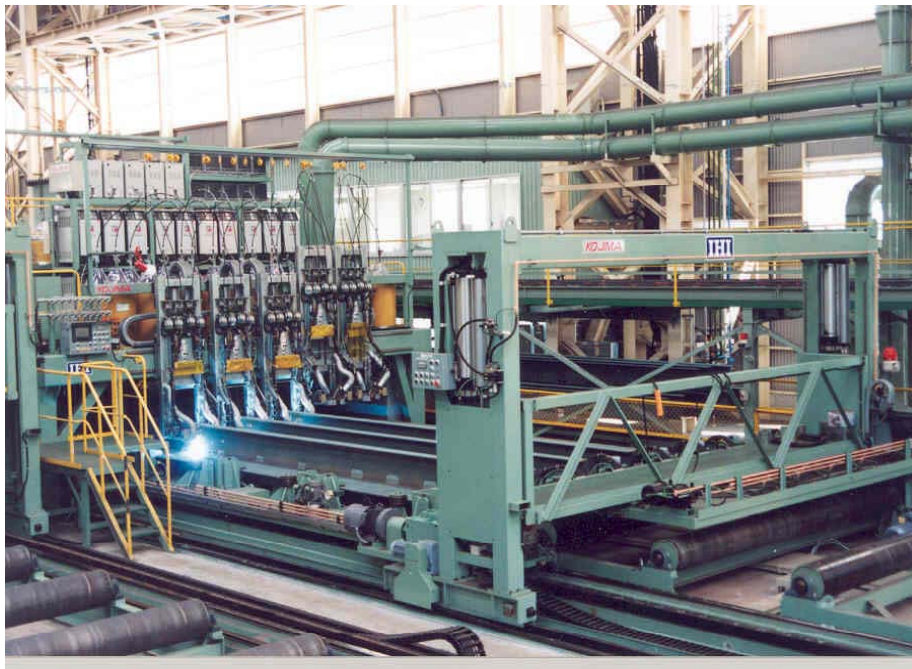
Unit panel and slit construction – Automatic welding of longitudinals to single plate
